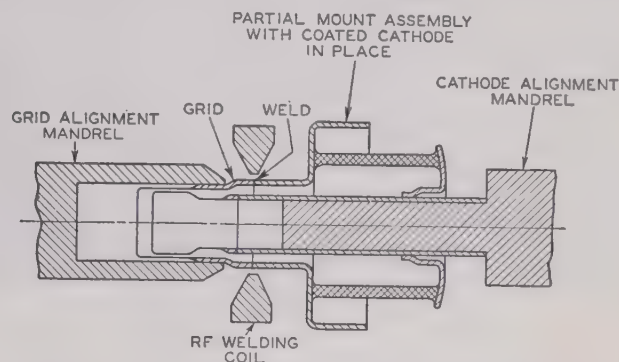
Arrangement of parts for rf-welding the grid to Kovar support; cross-sectional view.
